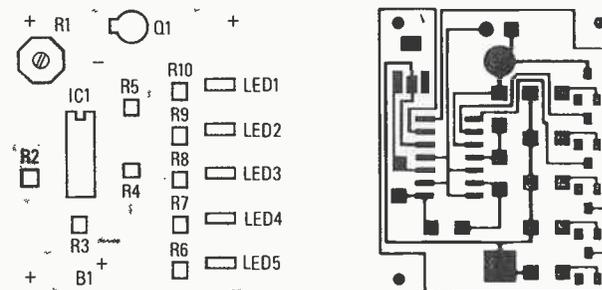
USE THIS LAYOUT a when building the circuit. The PC board is shown in b.
